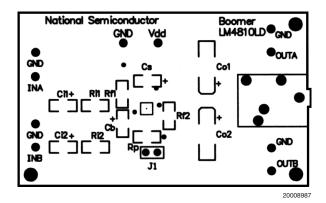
Recommended LD PC Board Layout Component-Side Silkreen
